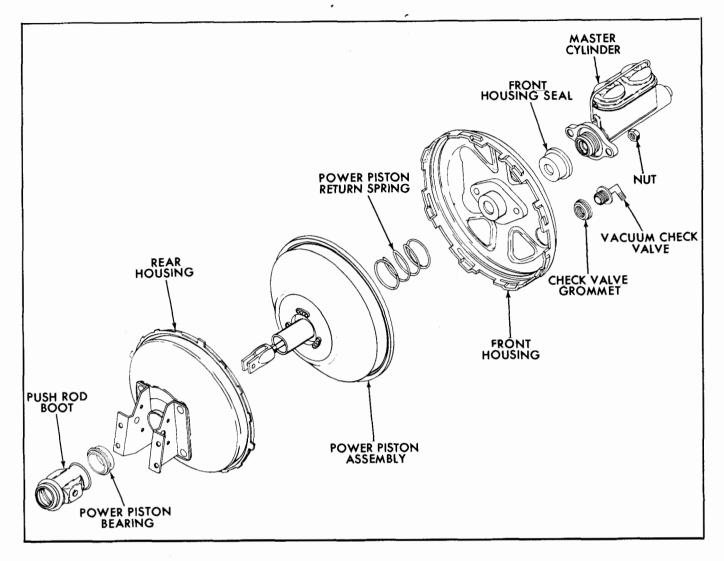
A-2 Exploded View A, G, F and X Series Power Brake Unit
